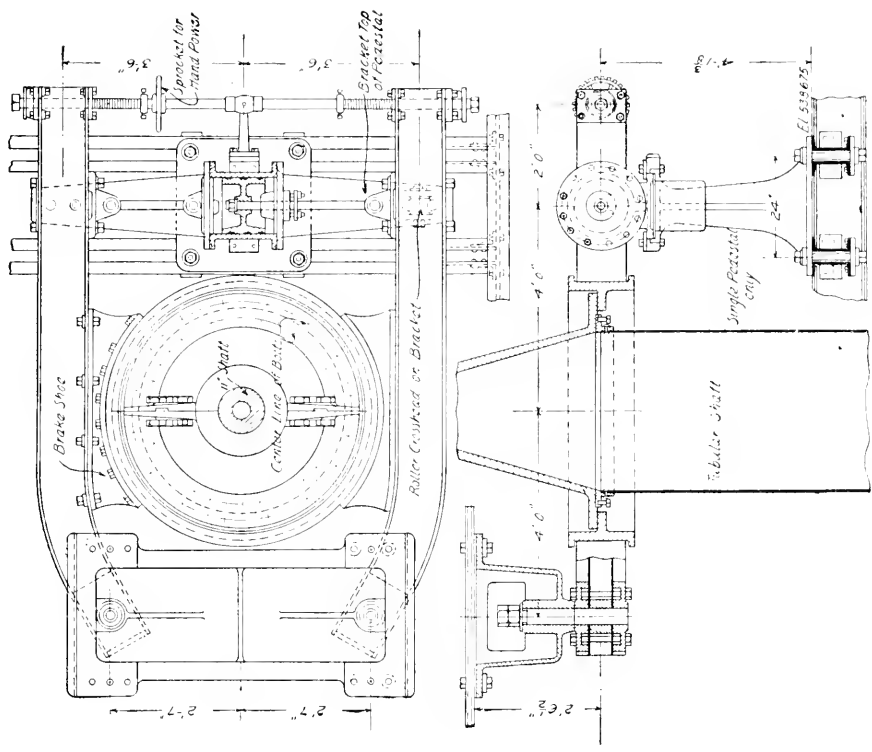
Brake on Main Shaft under Thrust-Bearing Girders.
